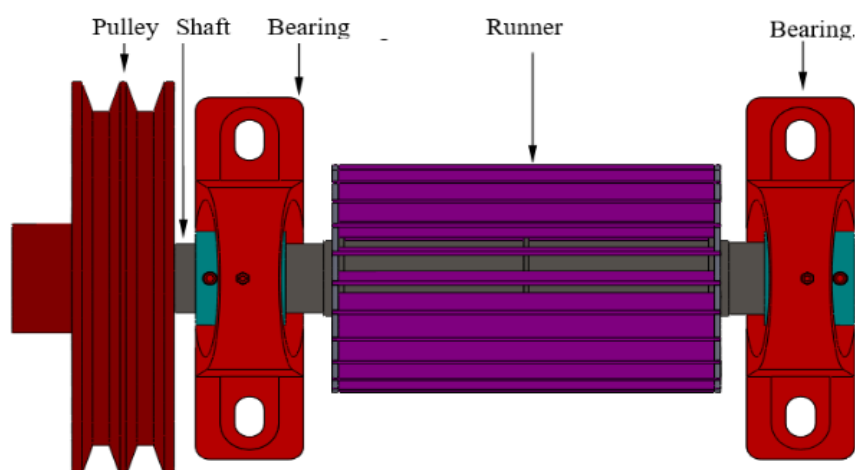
A schematic of a runner and shaft supported by two ball bearings
